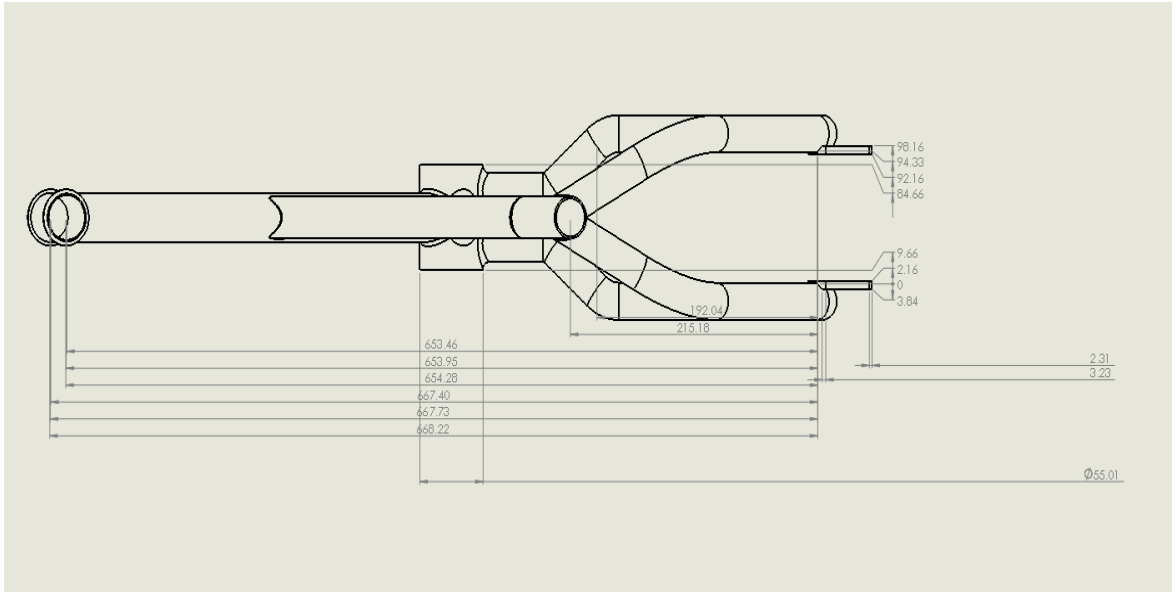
Dimensions of the frame in top view (all dimensions in mm)
